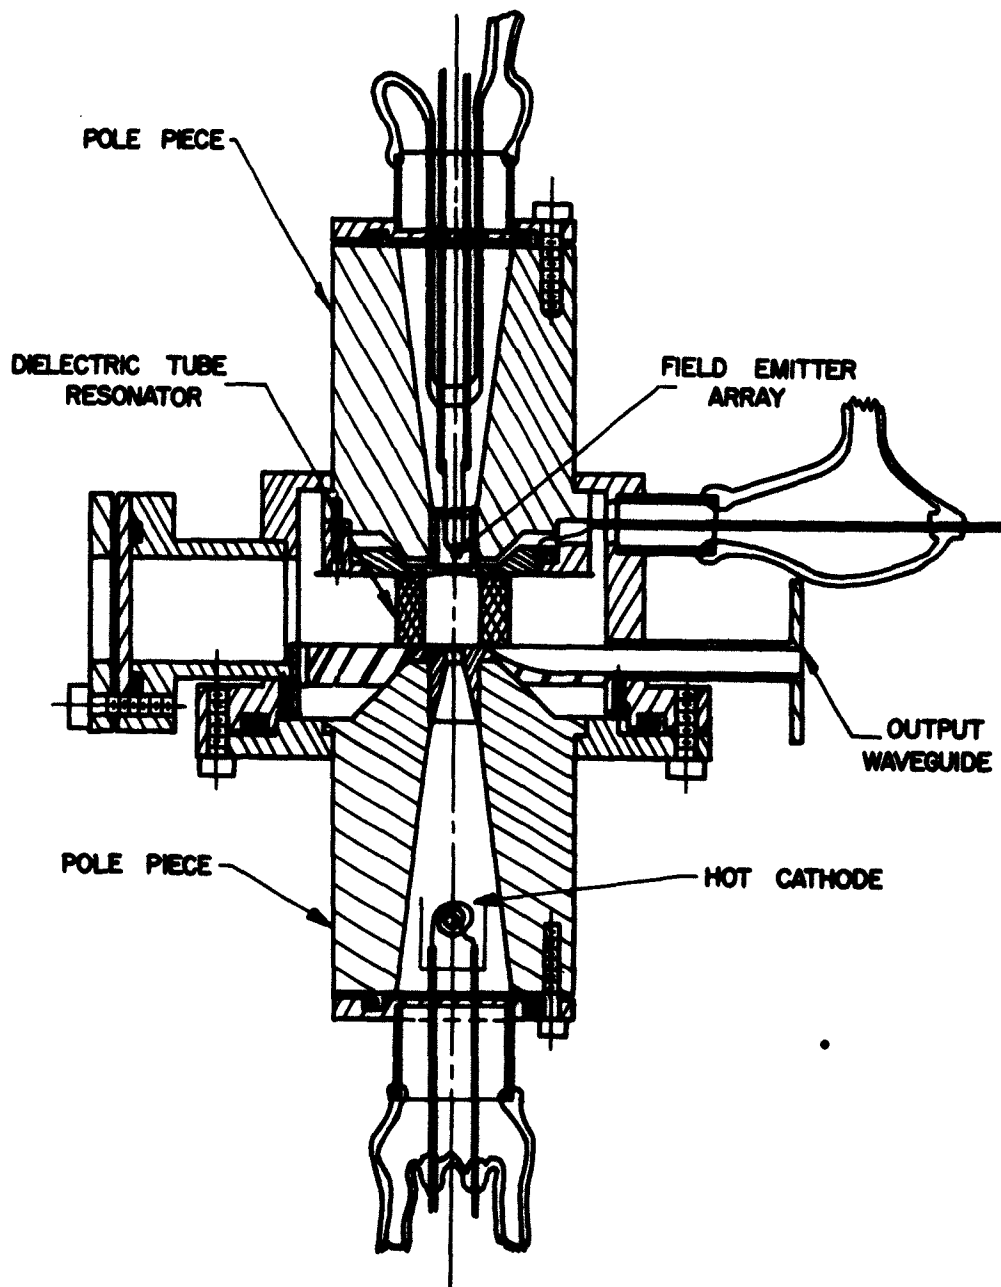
ASSEMBLY DRAWING FOR EXPERIMENTAL
